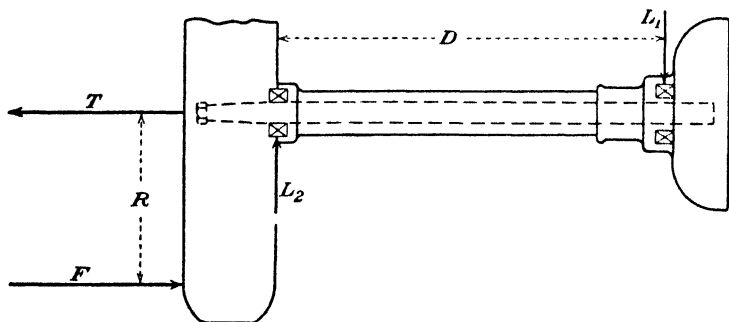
BEARING LOADS DUE TO SIDE THRUST ON WHEEL IN SEMI-FLOATING AXLE.
